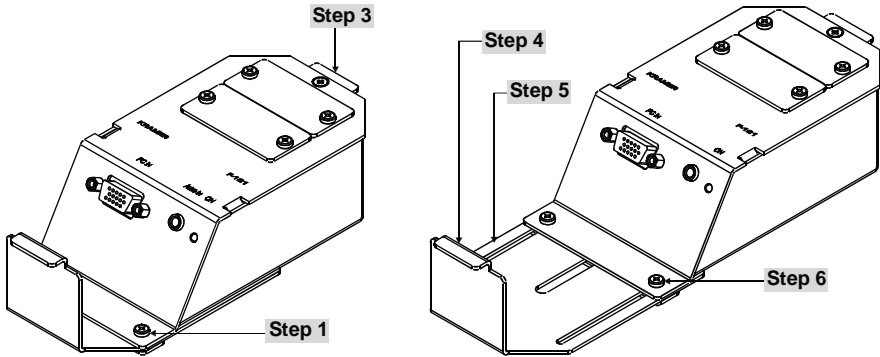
Installing the F-121 XGA / Audio Line Transmitter Mounting Box
